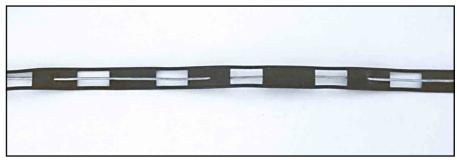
Final assembly method using interlaced #12 Copperweld wire through holes punched in the windowed ladder line.
